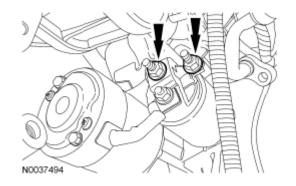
Locating Starter Motor Harness Wire Nuts Courtesy of FORD MOTOR CO.
